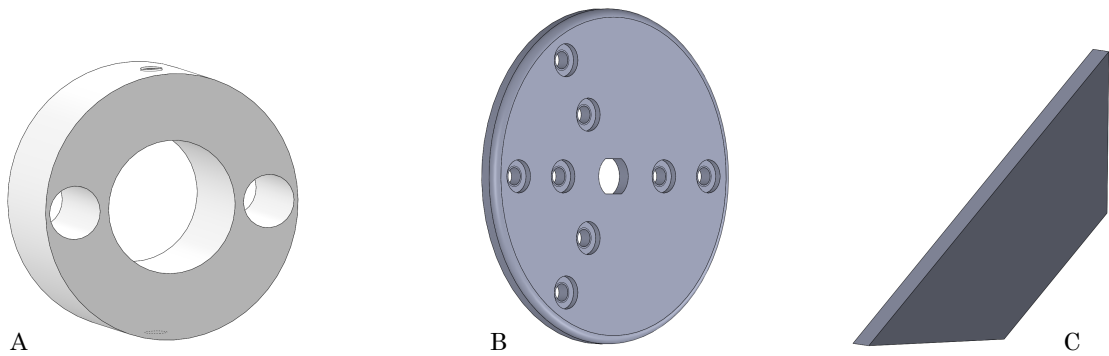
A: Bearing holder with holes for cabling. B: Propeller hub with 2 or 3 blade option. C: Support plate strut.
